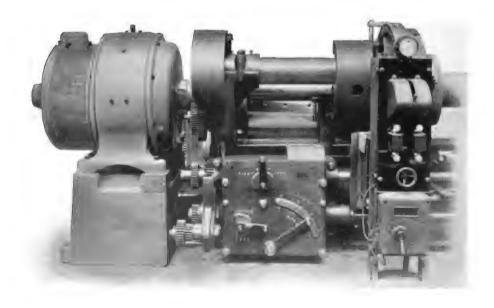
Nearer View of Lathe, Motor, and Switch-Gear.
